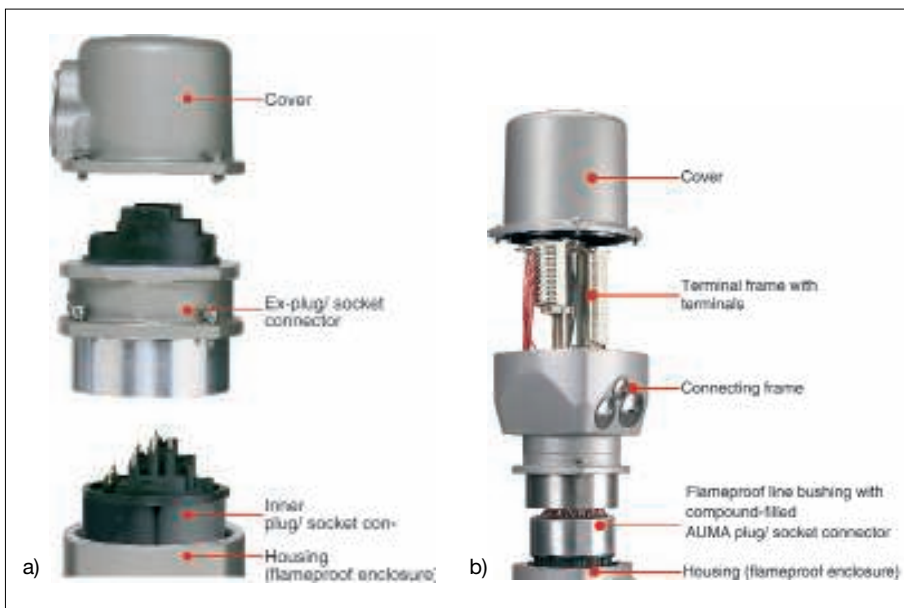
Plug socket connector/terminal board with screw type terminals (a), plug-in terminal connection with cage clamps (b)
